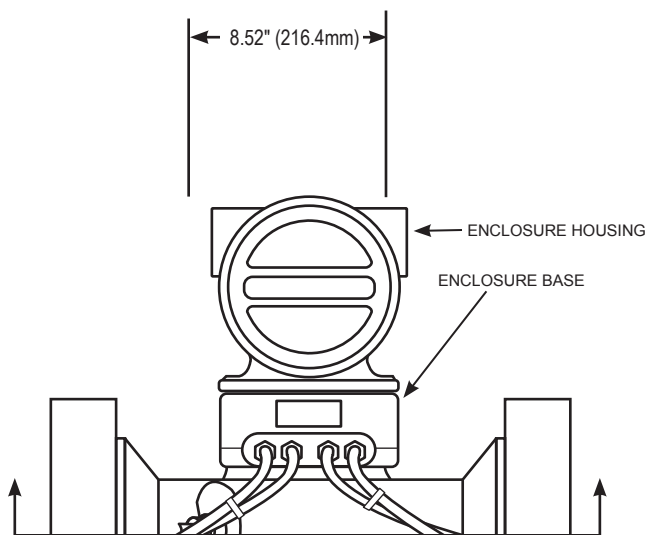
Factory installed position of 4" and 6" enclosure housing.
